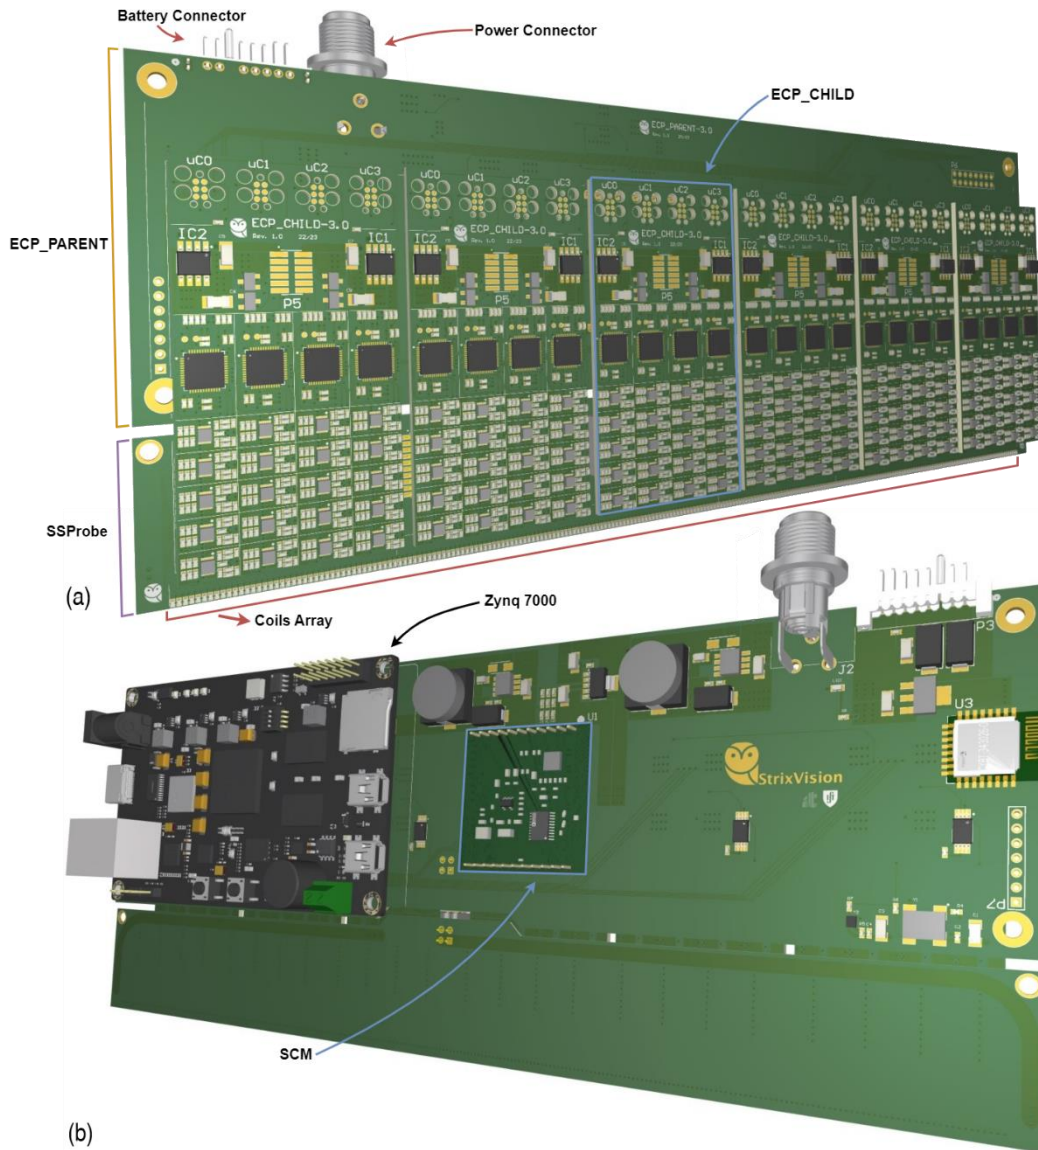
StrixVision PCB front view (a) and back view (b).
